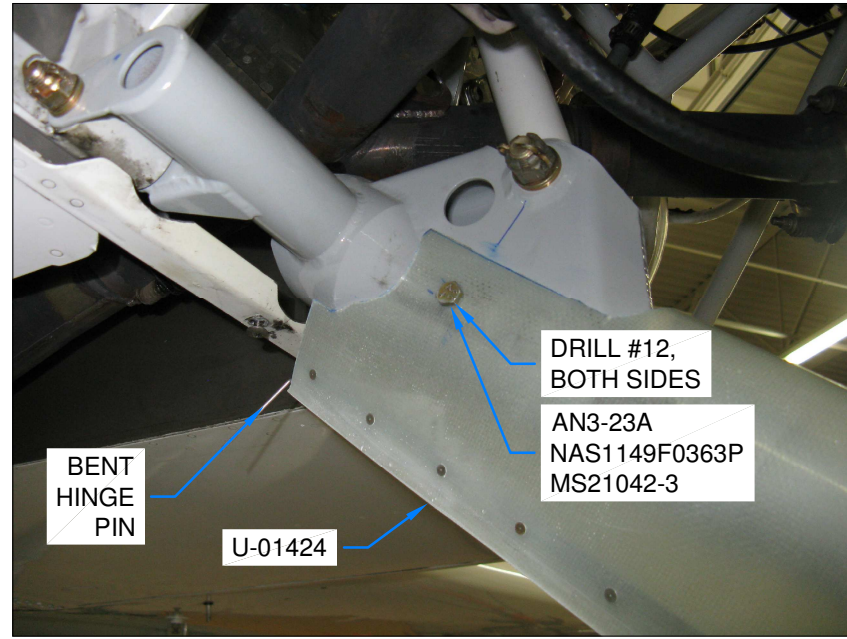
DRILLING THE NOSE GEAR LEG FAIRING
